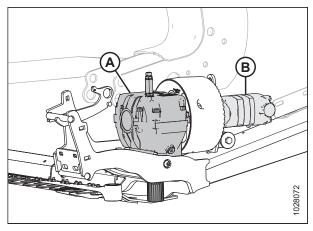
Left Side Knife Drive Box Shown – Right Side Similar
